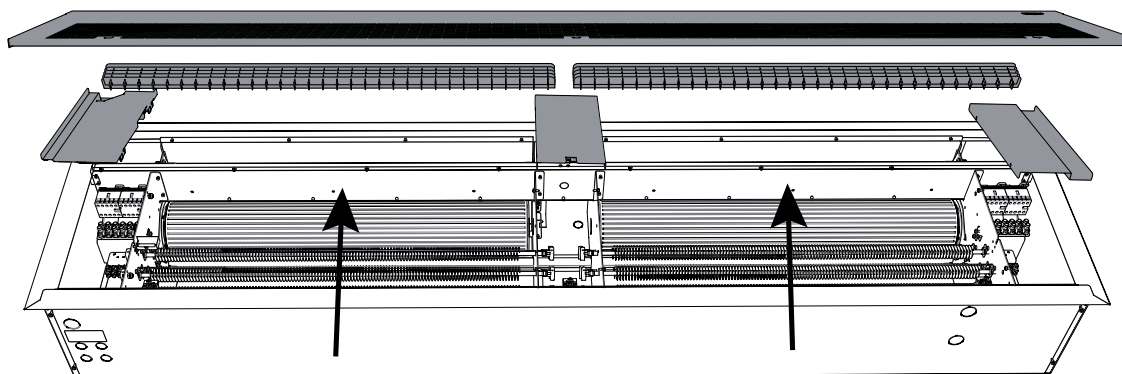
In order to mount the brackets, remove the service hatch, outlet grille and covering plates.
